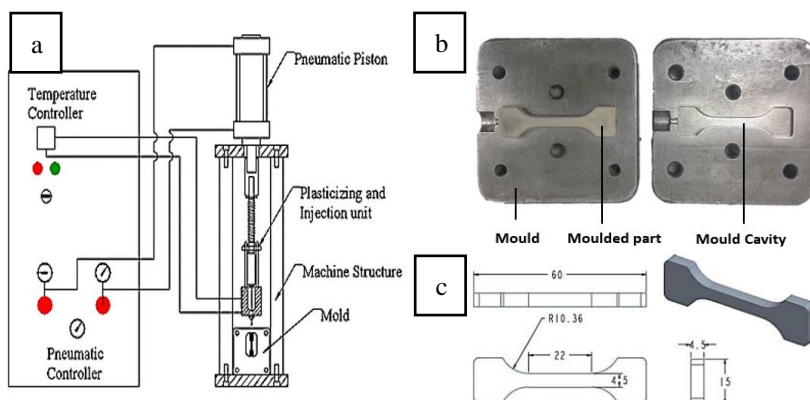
(a) Schematic diagram of manually operated injection moulding machine [18] (b) Mould used to produce tensile specimens (c) Tensile test specimen
